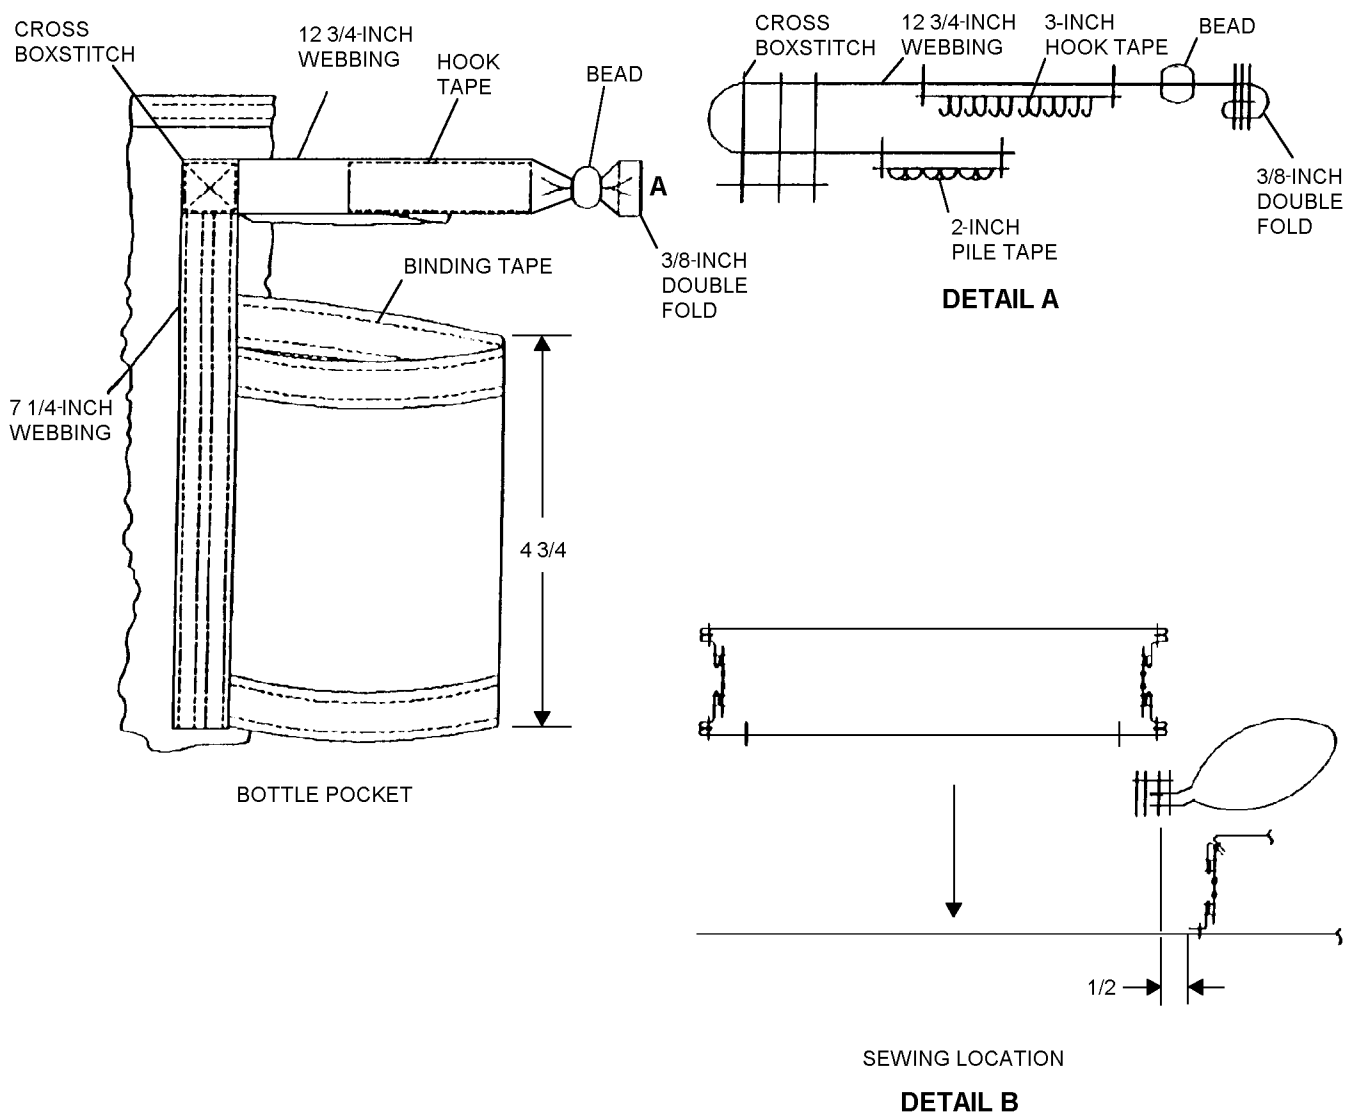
SRU-40/P HABD Bottle Pocket Assembly
